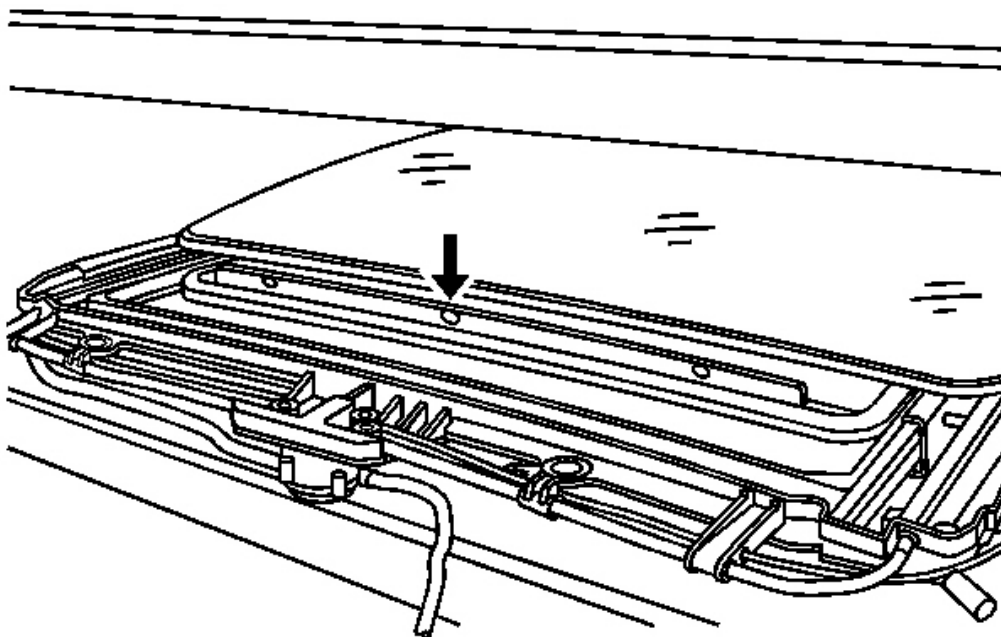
Identifying Front Edge Of Sunshade Panel Slider Pad
